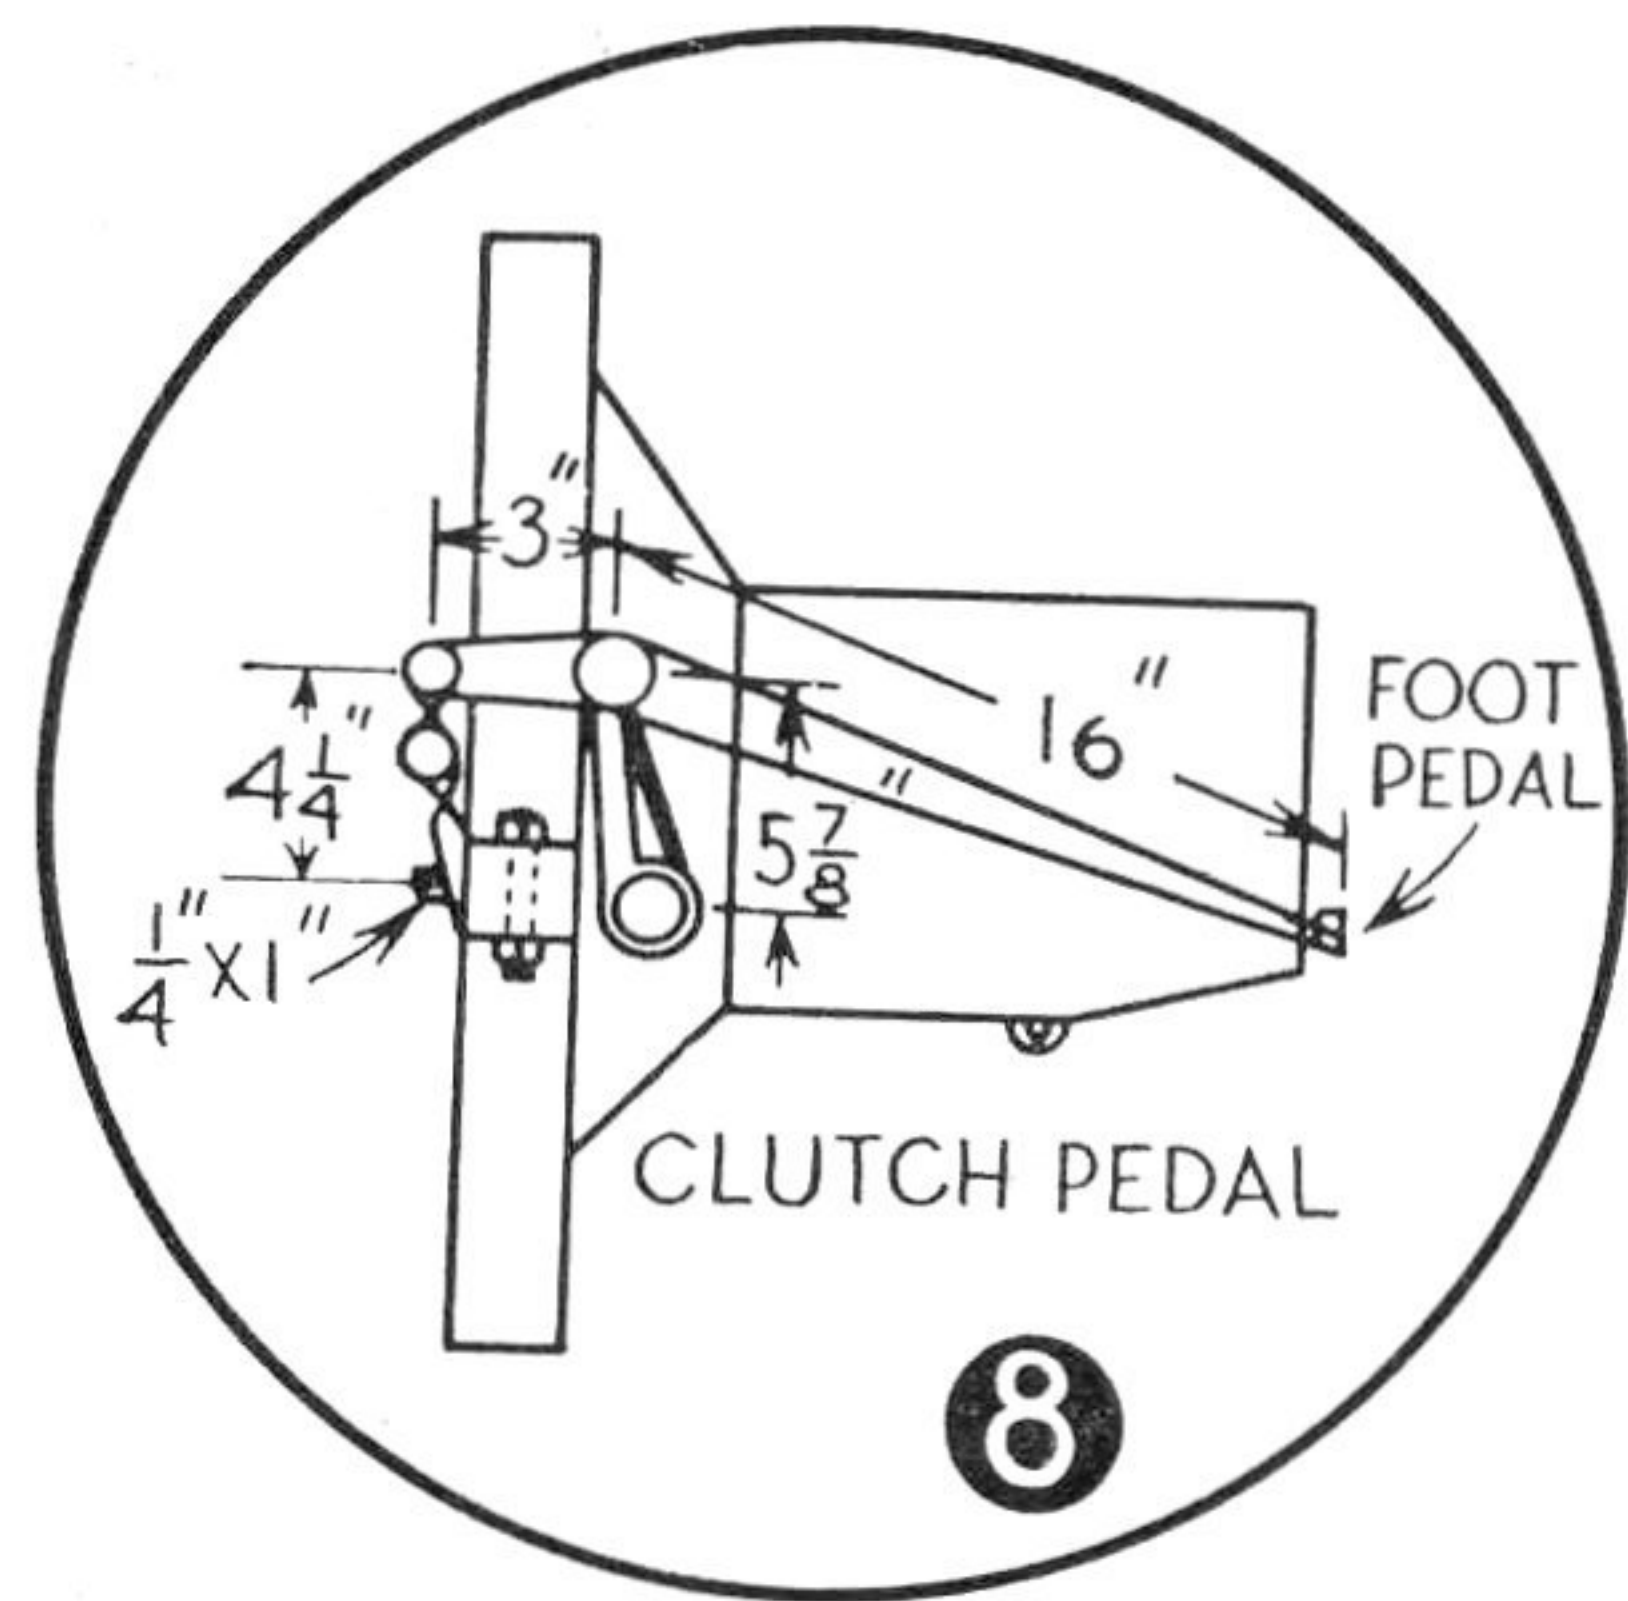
Suggested method of reconstructing clutch pedal and lever to work from driving seat position.
